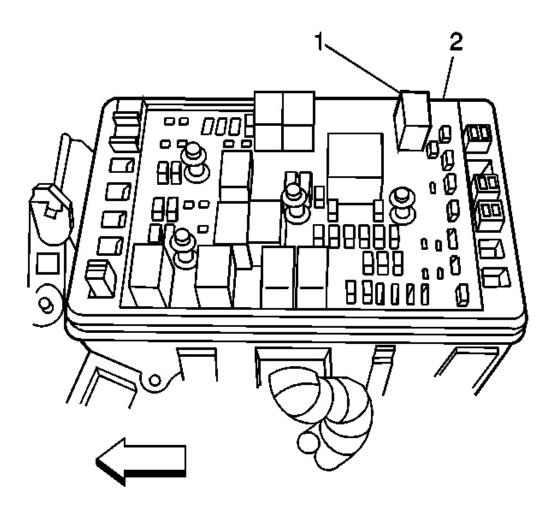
Locating Cooling Fan Relay Courtesy of GENERAL MOTORS CORP.
